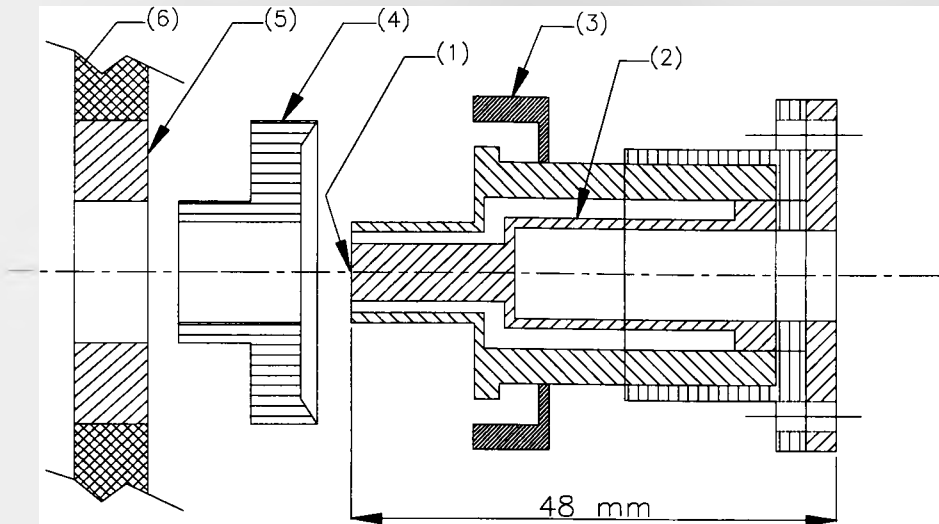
Pressure and shear transducer (B.E.S.T.), exploded assembly drawing. - (1) 5.6 mm \varnothing sensing surface, (2) strain gauged piston, (3) lock nut, (4) socket mount, (5) metal insert, (6) laminated socket.
